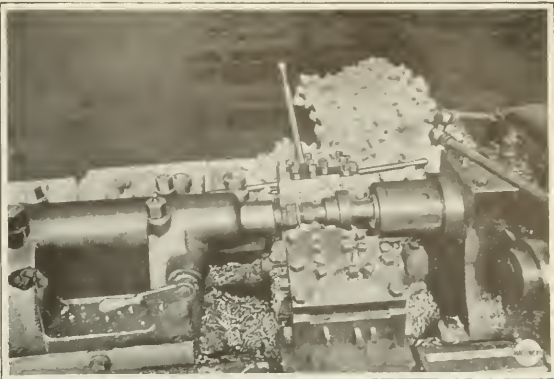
Forming Three-step Counter Gear with Gang Tools
